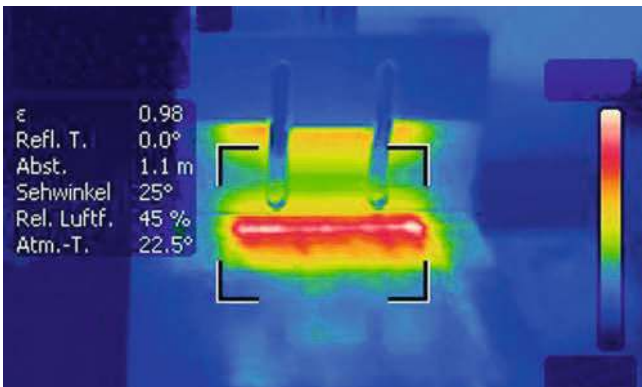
Infrared-camera shows heat development in material layers – welding tool does not heat up
